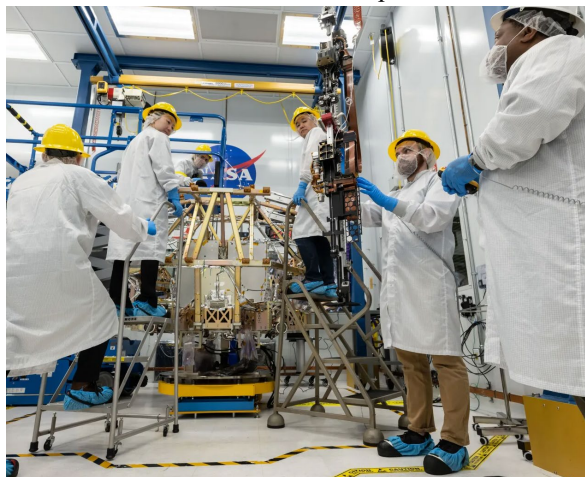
The TRIDENT drill integration onto the VIPER rover assembly. NASA/Bill Stafford
